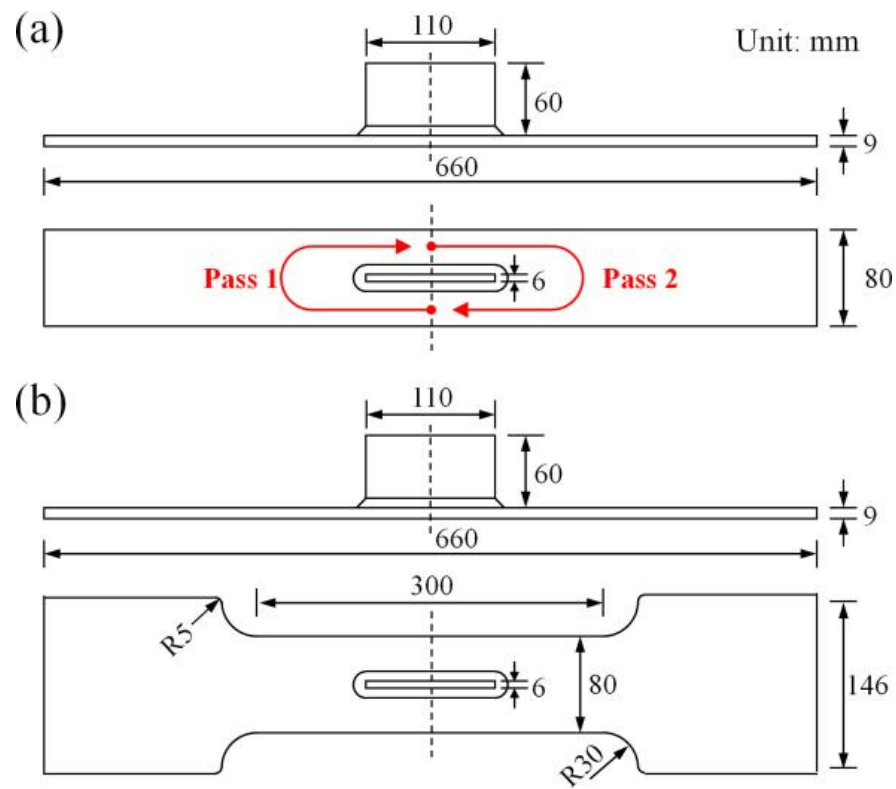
Specimen geometry and welding sequence. (a) Type-1 joint, (b) Type-2 joint.
